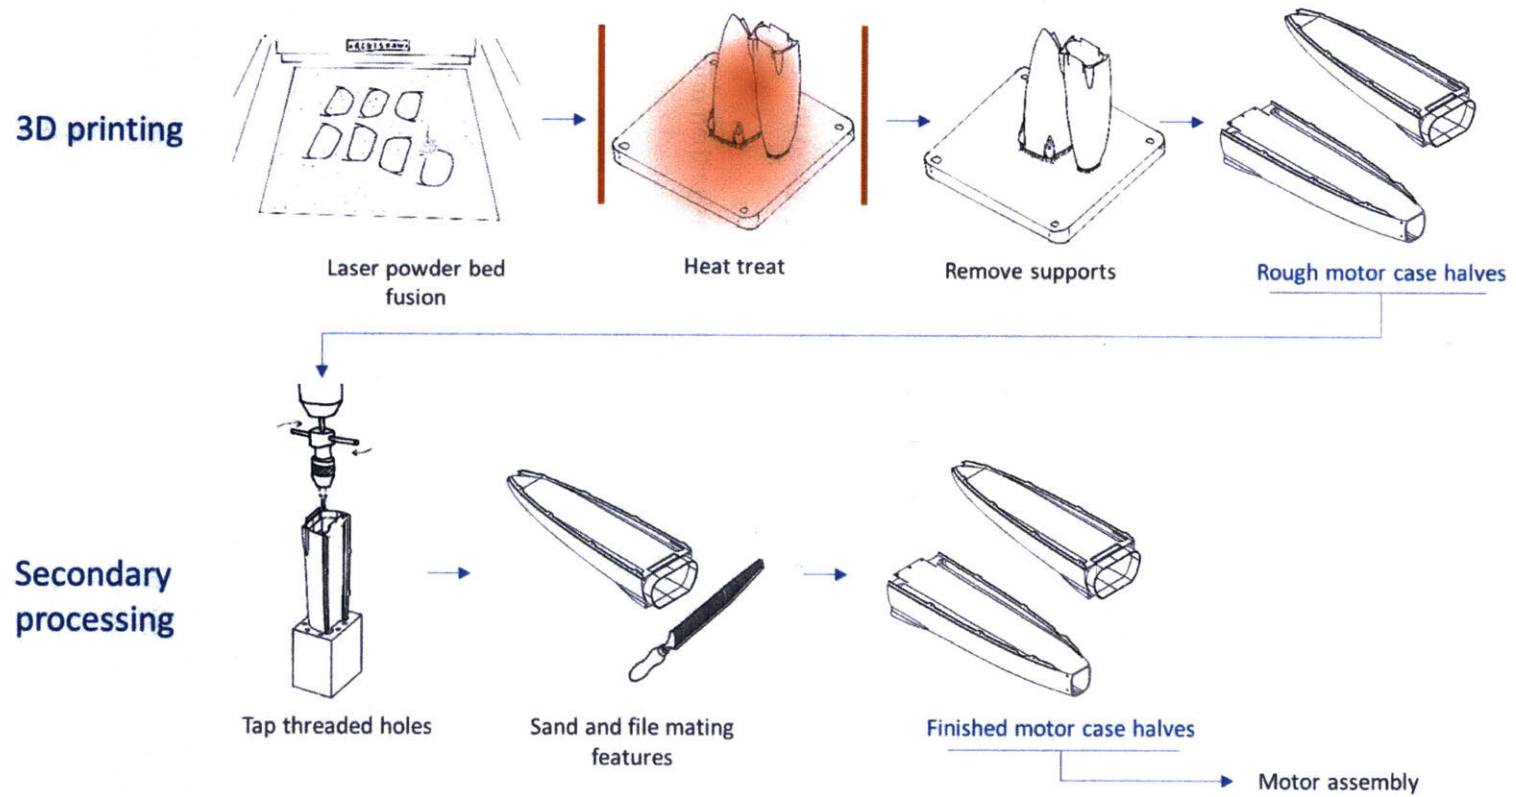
The motor case halves are produced by 3D printing, followed by a few post-processing steps.
